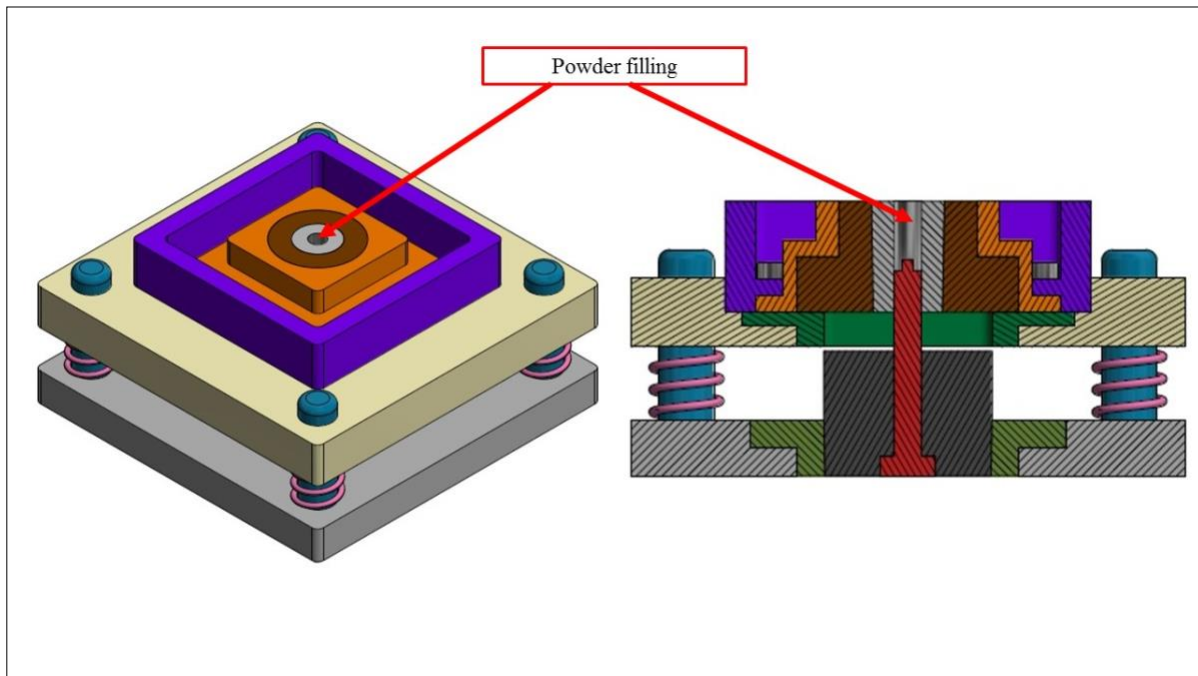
THE LOWER PARTS OF THE NEW TOOL DESIGN AND WHERE THE POWDER GOING TO BE FILLED
